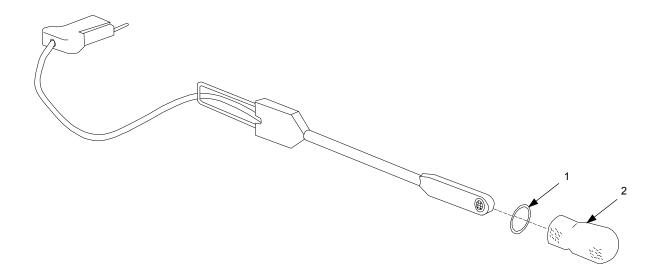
Headset, Electrical Assembly (Sheet 2 of 2)
